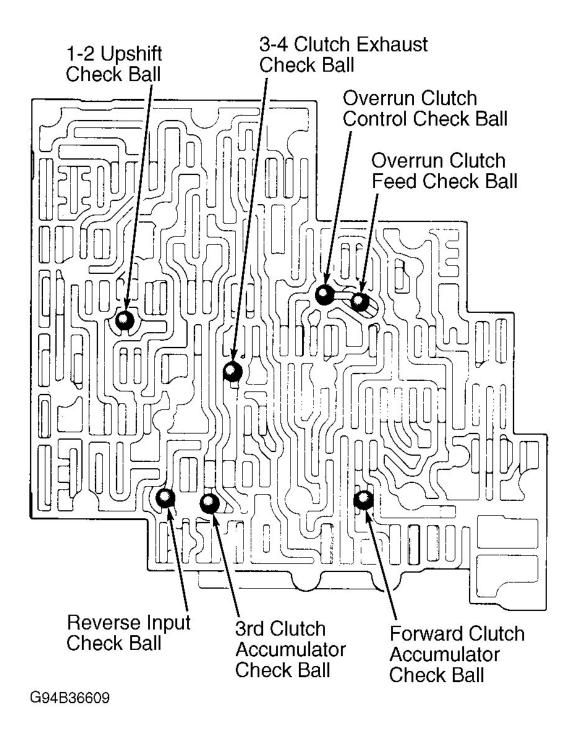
Locating Valve Body Check Balls (4L60-E) Courtesy of GENERAL MOTORS CORP.
